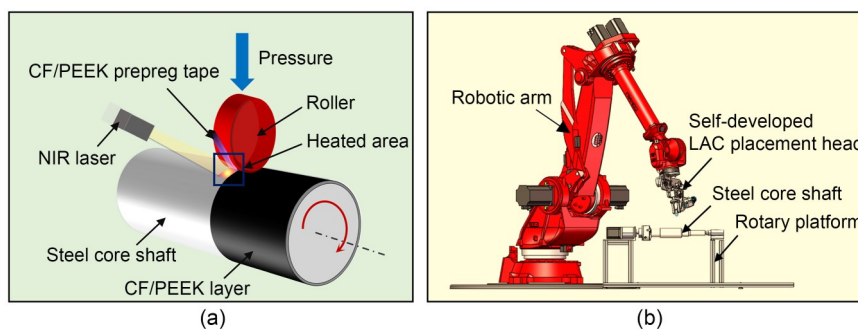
Hybrid shaft manufacturing with the LAC process: (a) principle of LAC; (b) manufacturing platform
